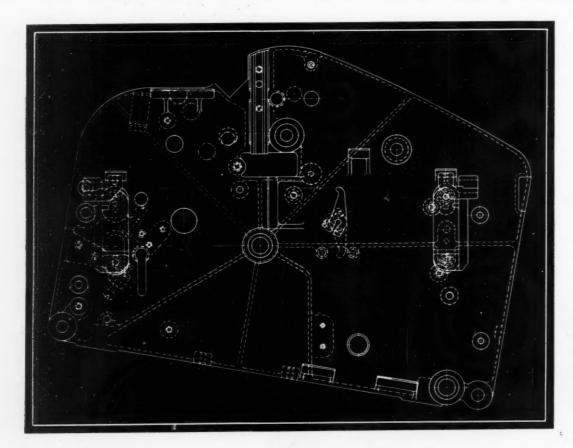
Drawing of die-cast side frame showing some bushings and levers in place. Simple coring at bushing bosses provides the oil holes
